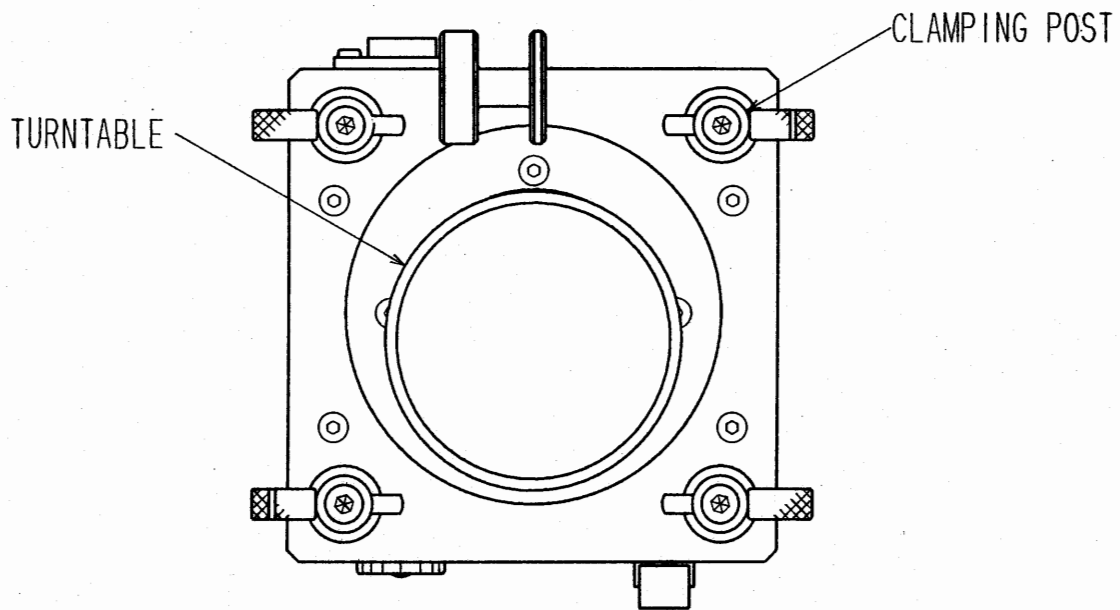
TOP VIEW WITH POLISHING HOLDER INSTALLED
